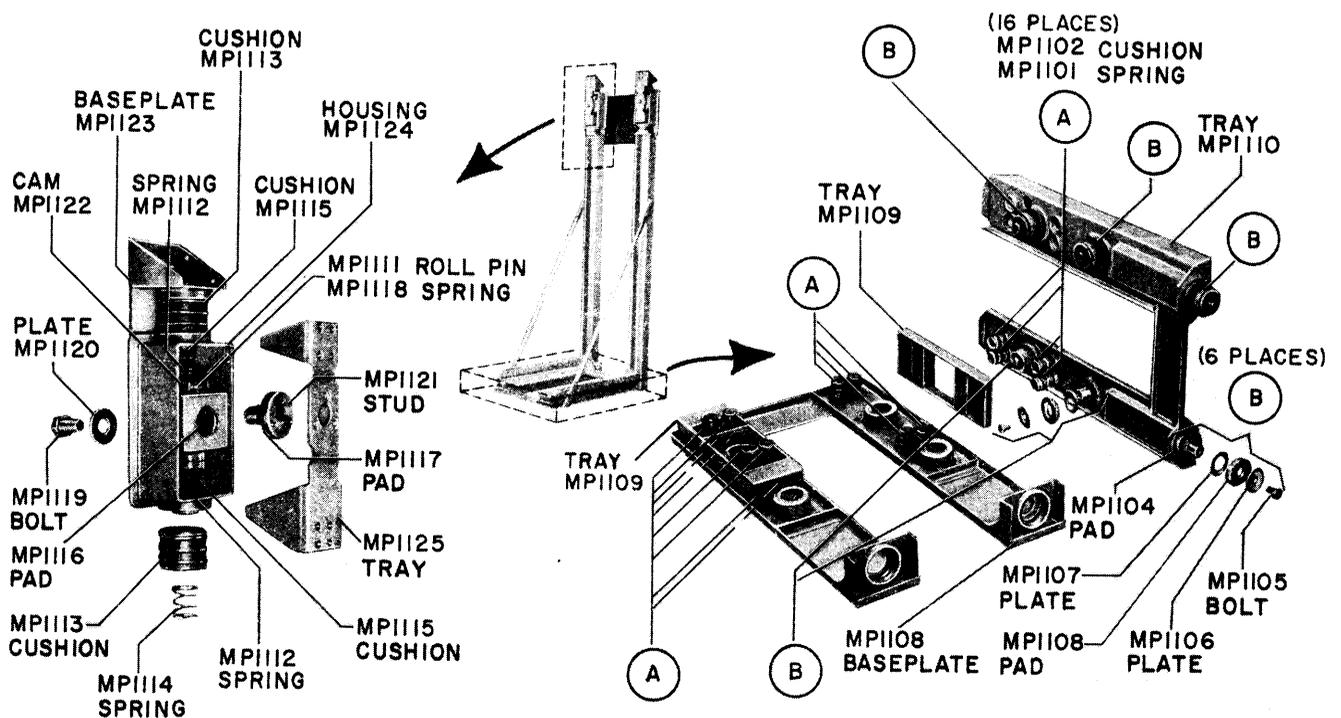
A. Mounting MT-2170/WRT, Replacement of Parts
